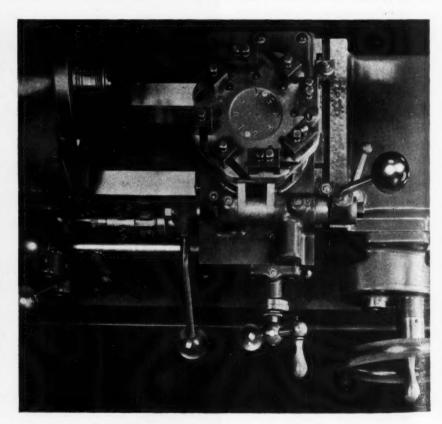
(Left) Machine Shown in Fig. 1 Equipped for Turning and Threading Part to Close Tolerances.
